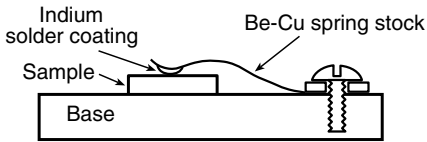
Spring contact for convenient, quick changing of contacts when testing many samples.
